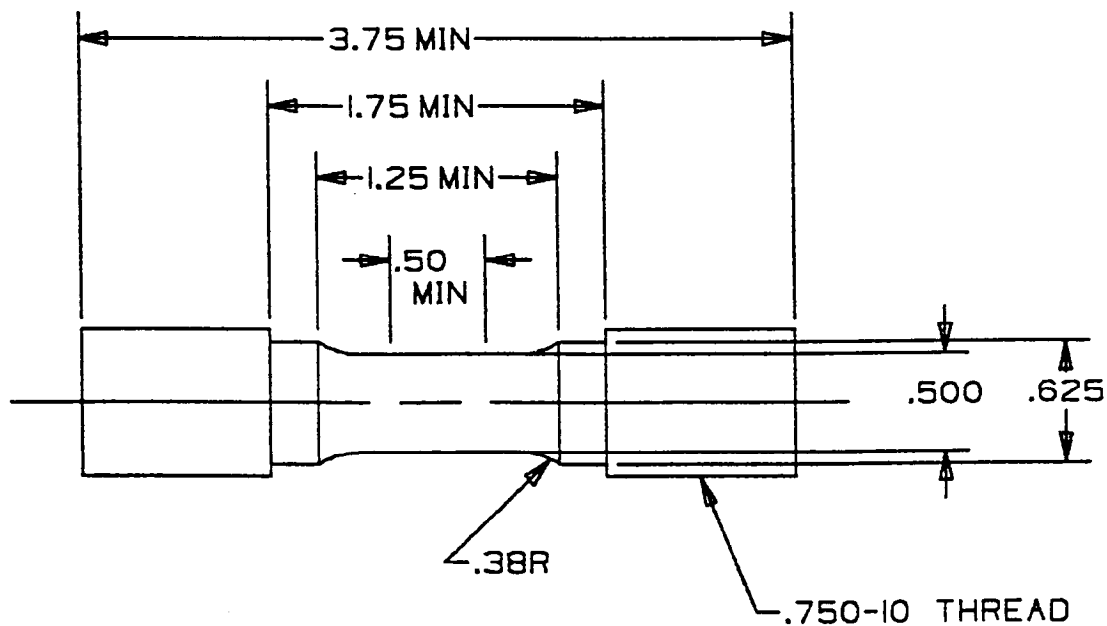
ASTM E8 Cast Iron Tensile Test Specimen
